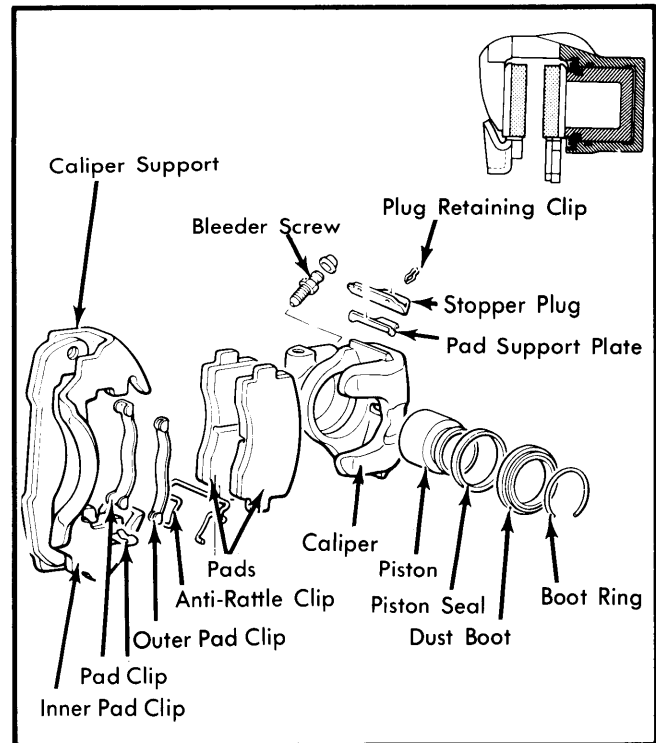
Exploded View of Front Disc Brake Caliper (Challenger, Sapporo & Pickups)
